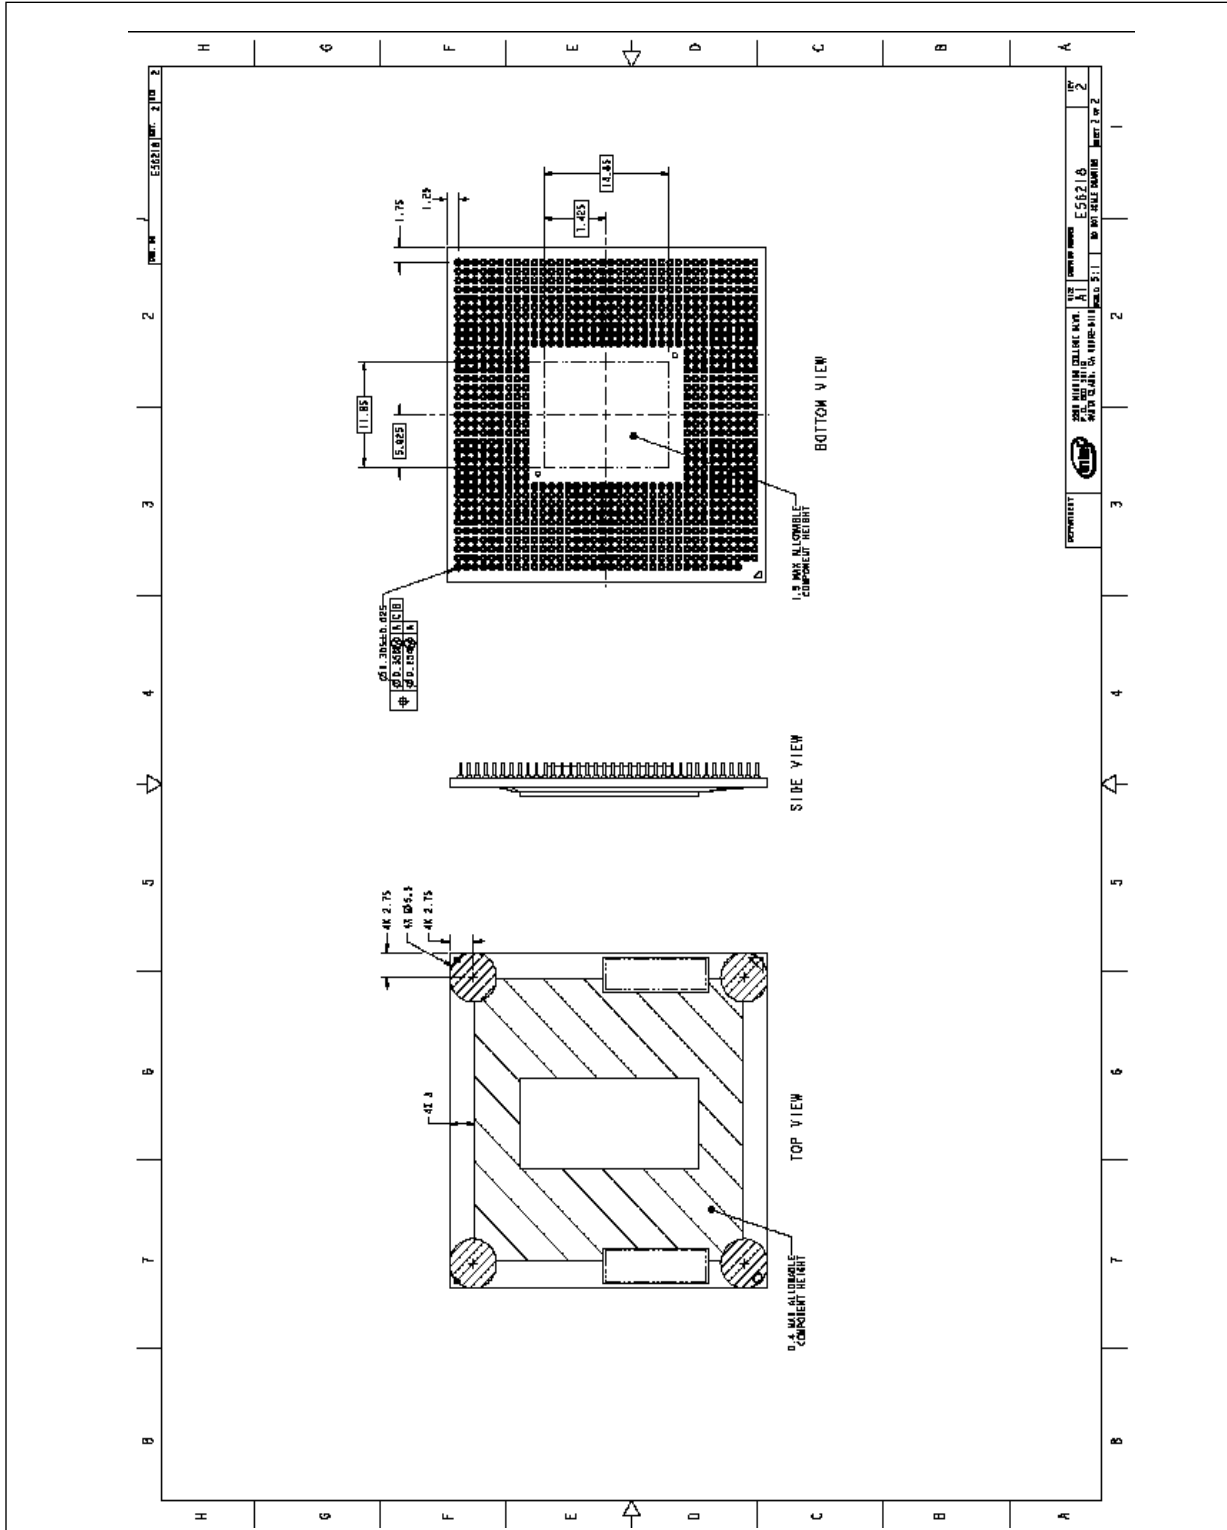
Processor rPGA988B 4C (GT2) Mechanical Package (Sheet 2 of 2)
